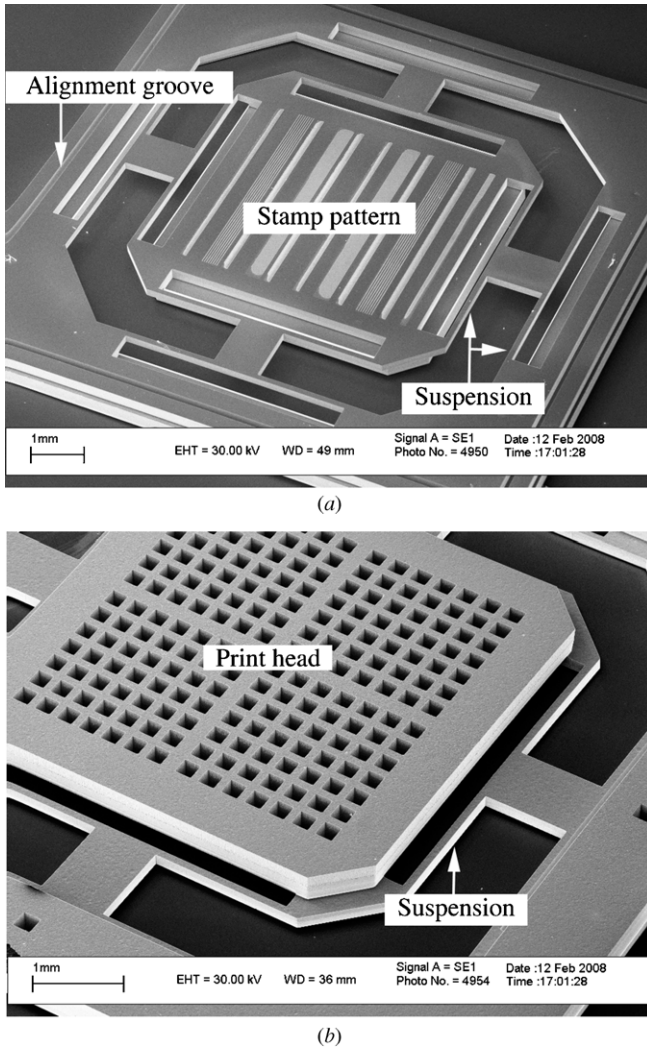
SEM view of (a) completed print engine and (b) rear side of print head and suspension.
